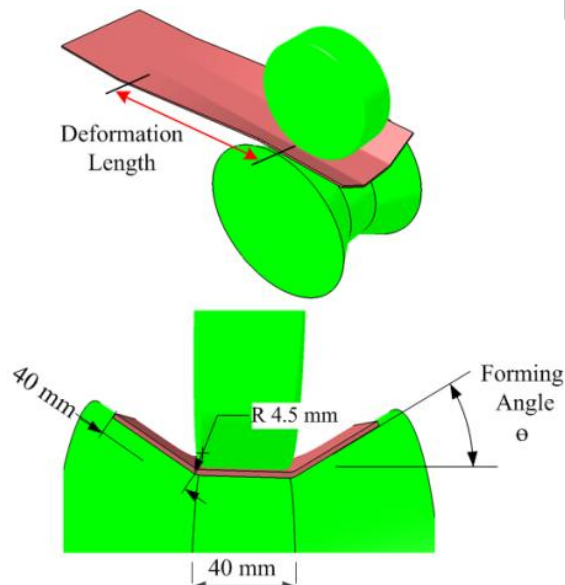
Geometrical characteristics of roll formed section in a single stand roll forming line
